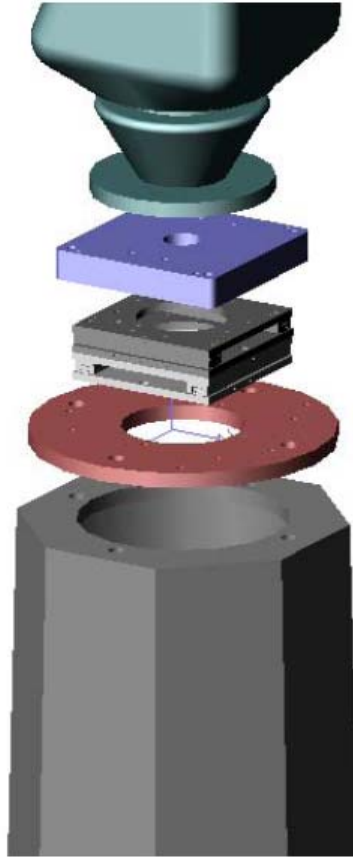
Exploded CAD view of main components in a pole-mounted passive isolator design.
